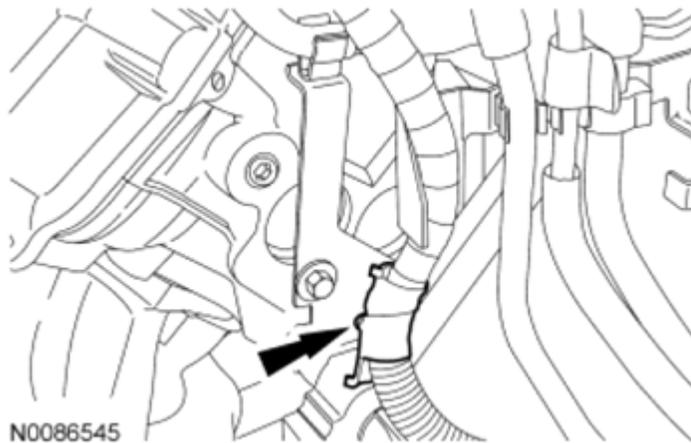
Locating Transmission Wiring Harness Retainer And Intake Manifold Vacuum Tube Support Bracket
